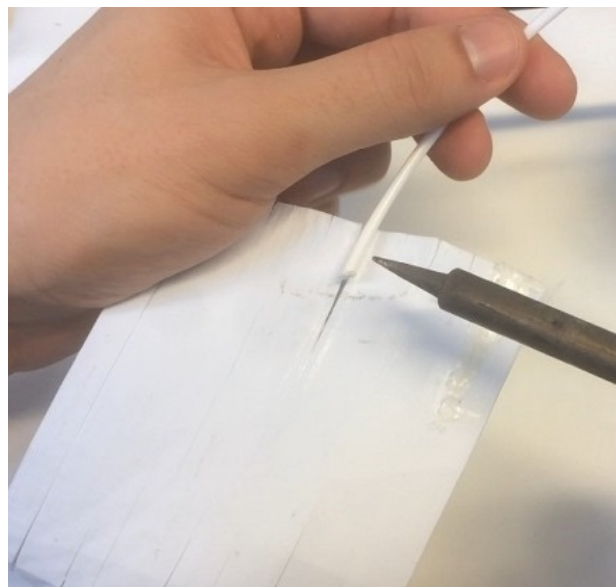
Repairing a large crack with a soldering machine
